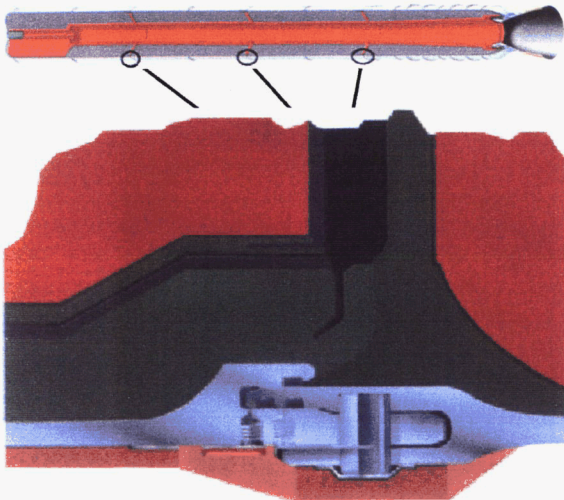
Assembled RSRM Showing Internal Insulation J-joint Configuration for the Three Field Joints
